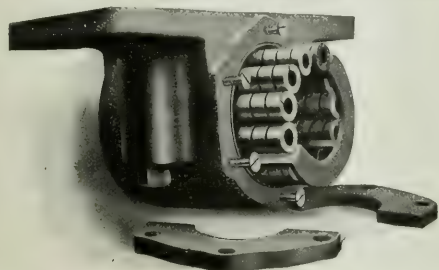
HYATT AXLE BOX WITH END PLATE REMOVED.
